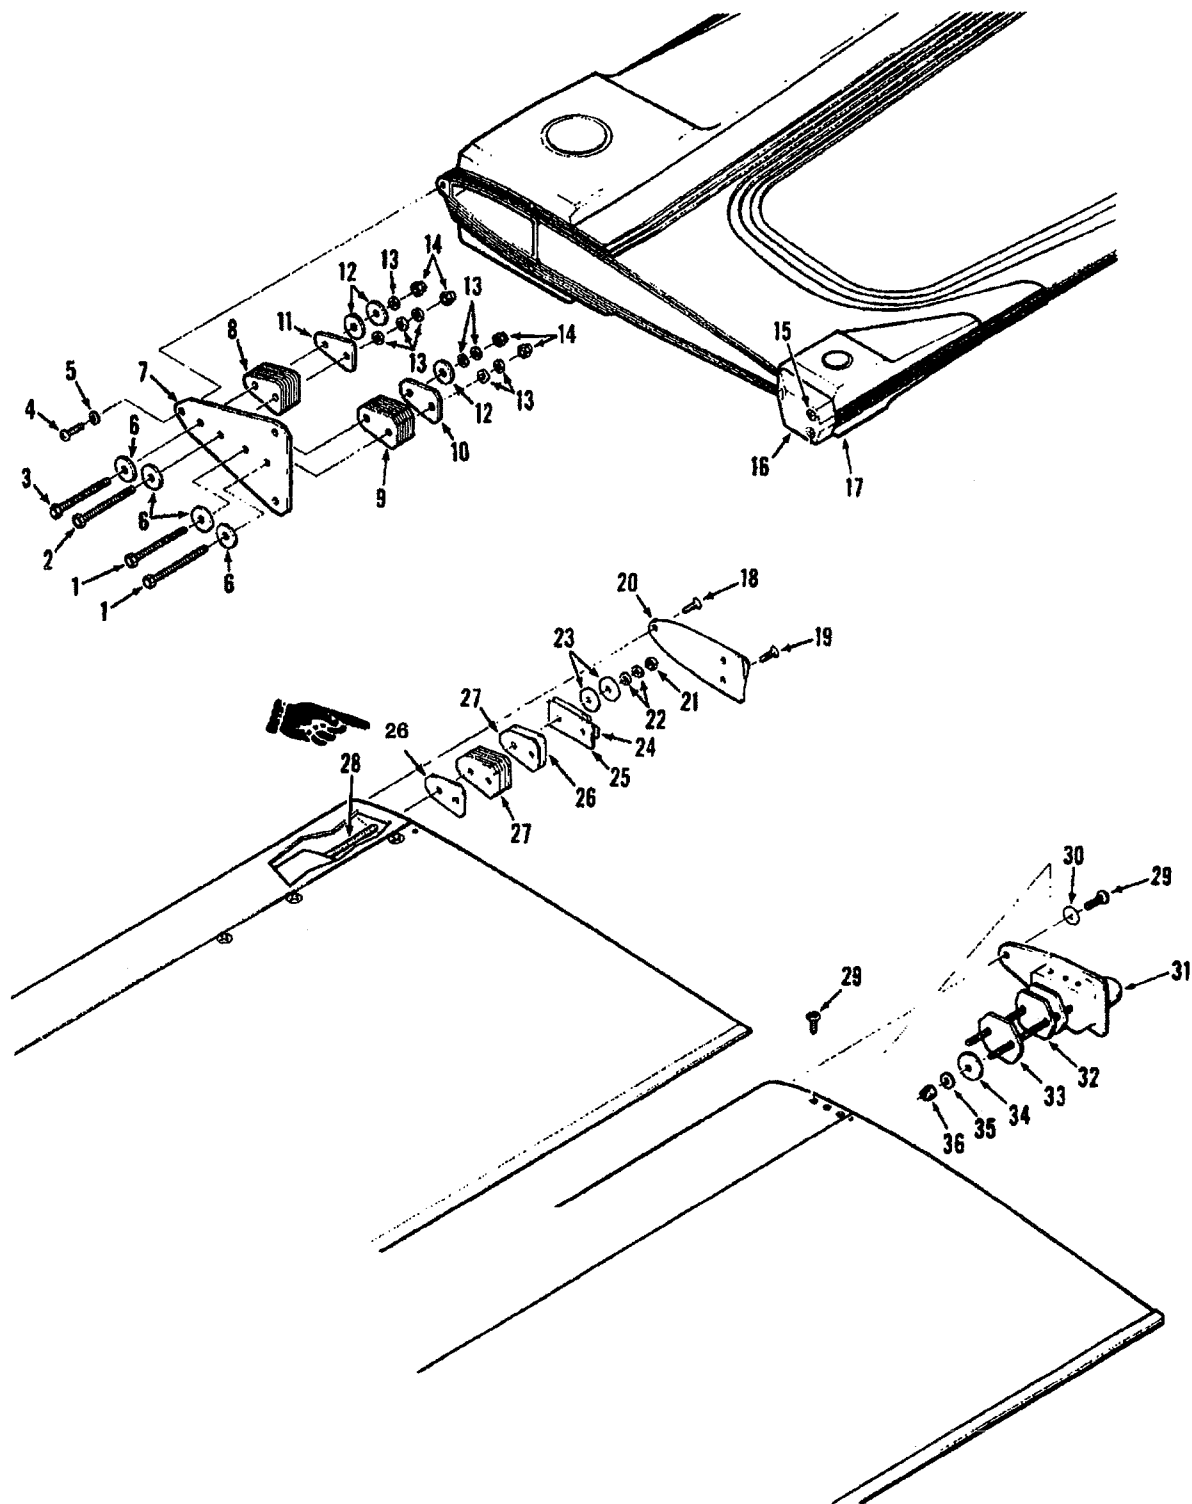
Main Rotor Blade Assembly – Installation (Sheet 1 of 2)
